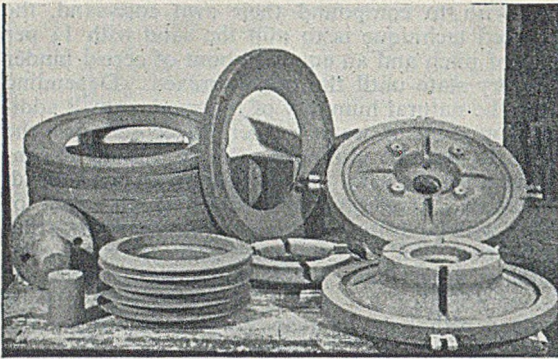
Complete Set of Cores, made from Sand containing Pelleted Pitch, for the Grooved Barrel of a Whaling Winch.
